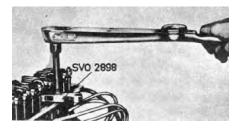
SVO 2898 Wrench 11/16" for post-tightening the cylinder head screws
